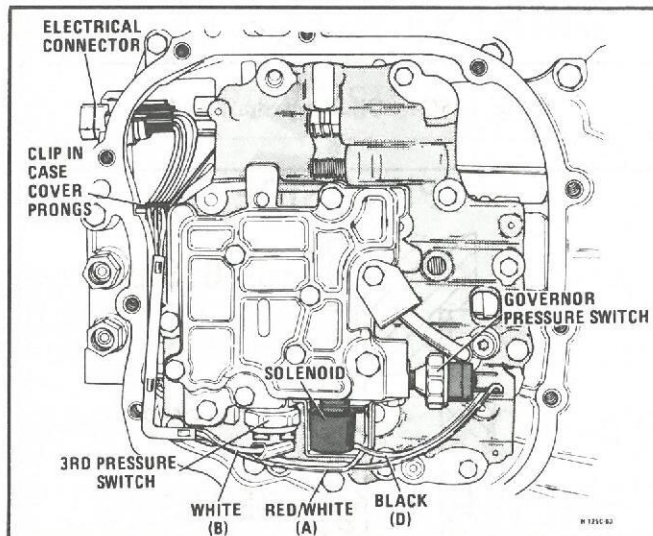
C-1—Auxiliary Valve Body (Diesel)
